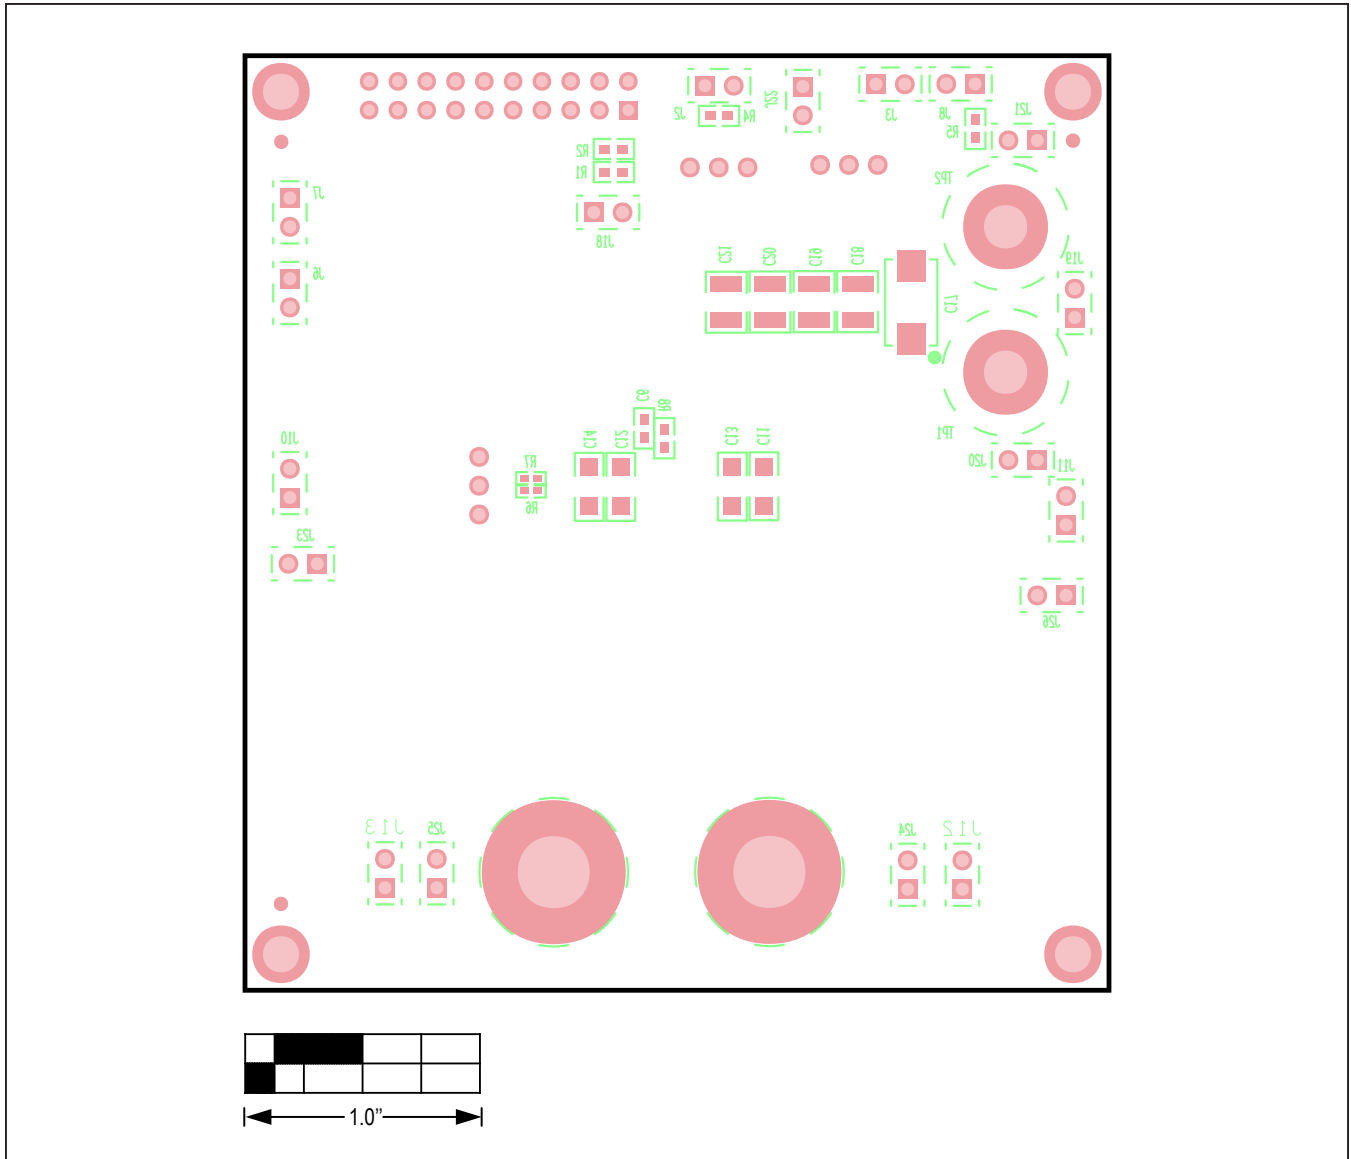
MAX20499A EV Kit Component Placement Guide—Bottom Assembly Drawing
